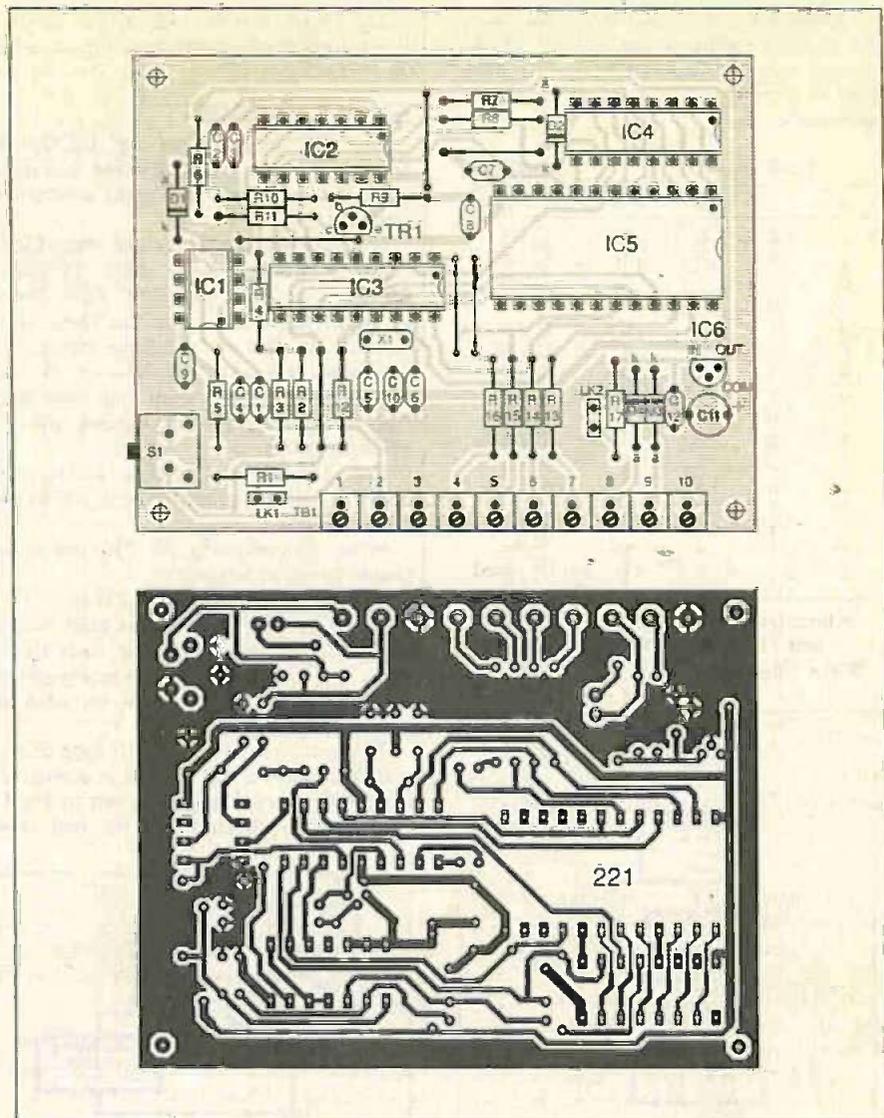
Printed circuit board topside component layout and full size underside copper foil master pattern for the Time and Date Generator. The right-angle 10-way screw terminal block (TB1) may have to be made up from "linkable" 2-way types.
